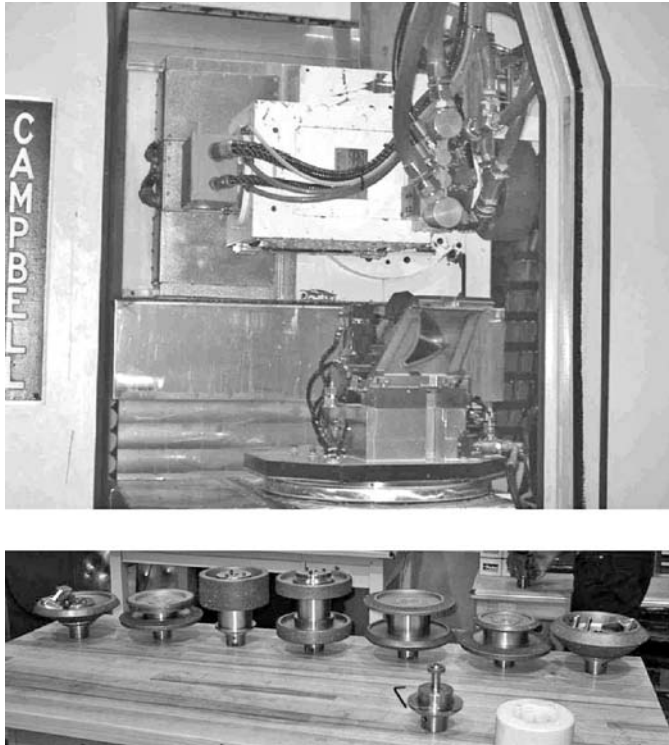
Hard-point mounting fixture for nozzle guide vane.
